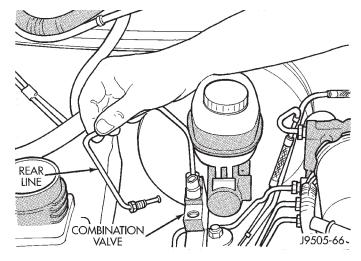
Disconnecting Master Cylinder Rear Brakeline
